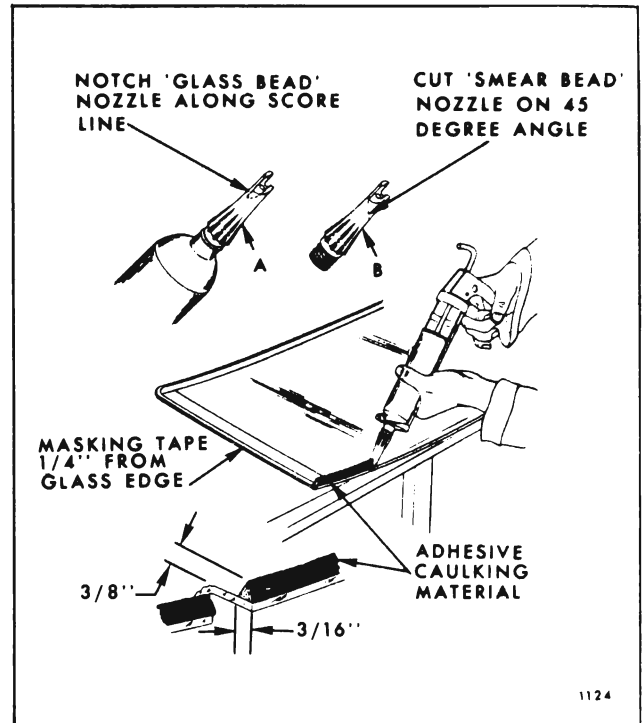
Adhesive Caulking Installation - Extended Method
